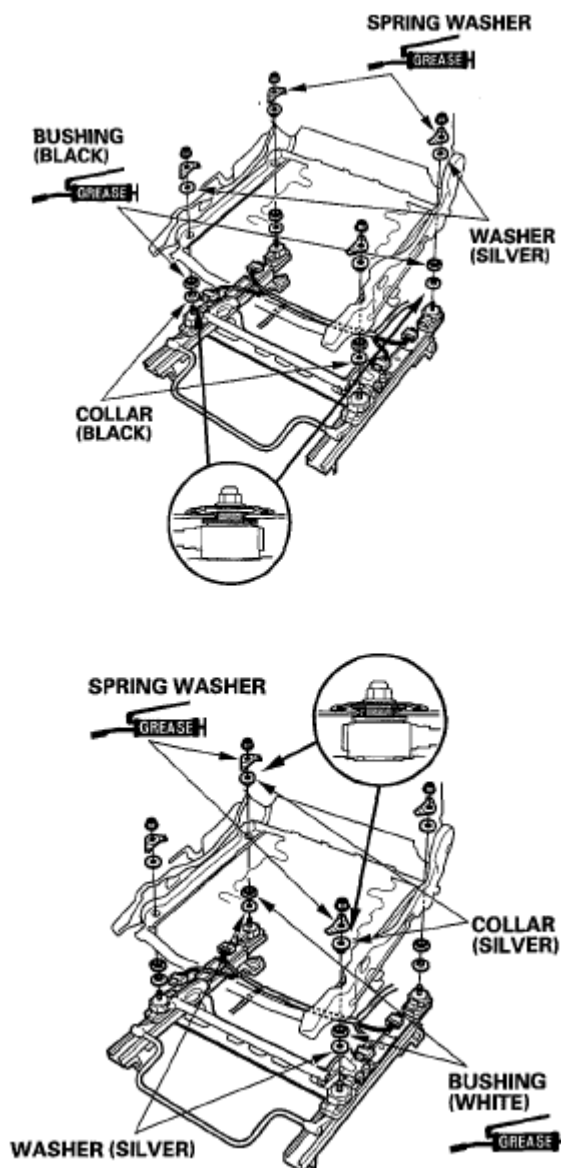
Identifying Multipurpose Grease Apply Area To Spring Washer And Bushing
